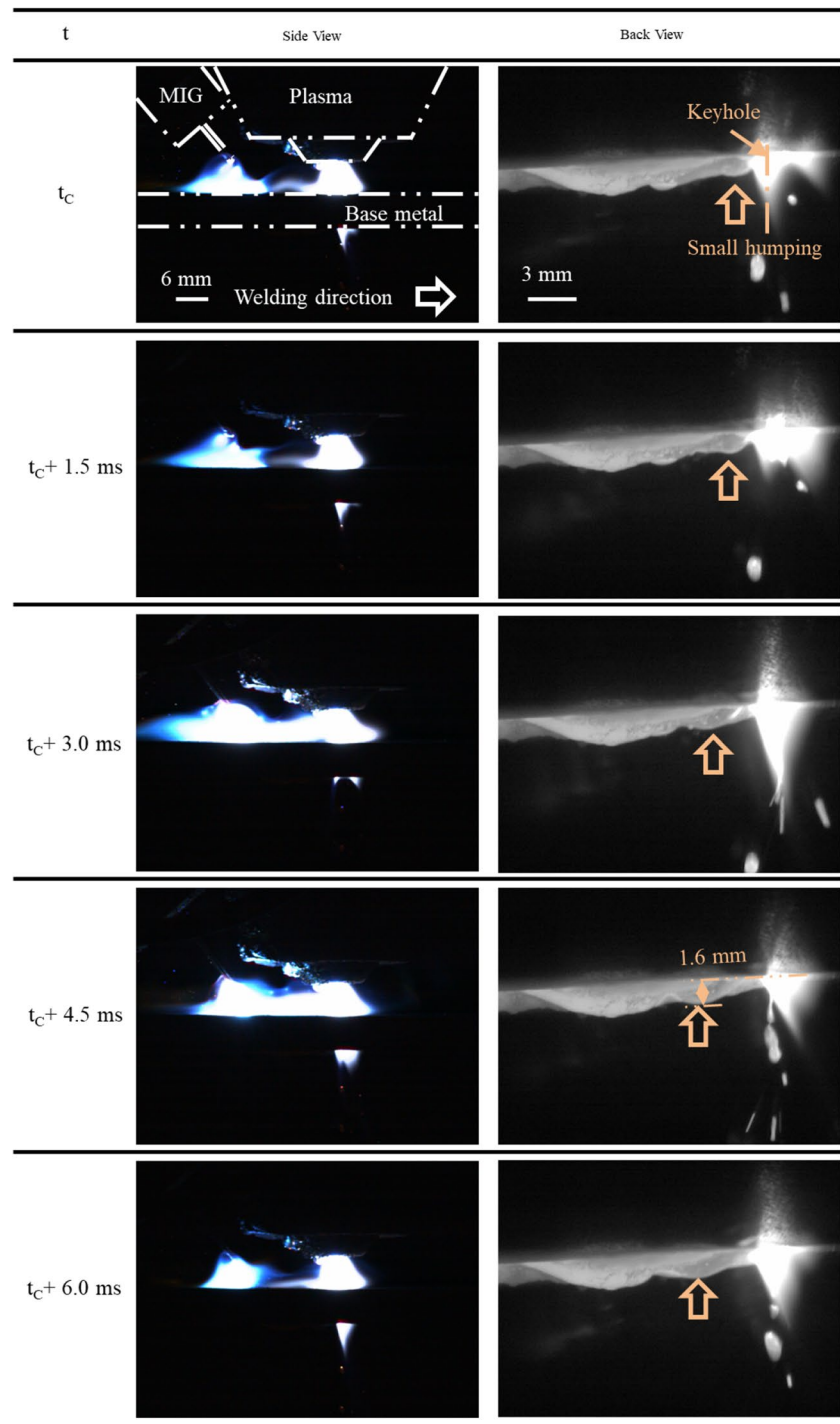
An example of time sequential images of bottom side weld pool with humping and resultant weld bead for DC-MIG current
